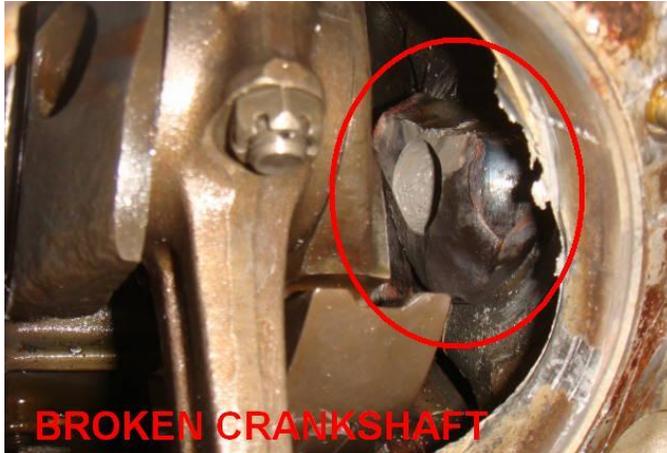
rupture of the crankshaft as seen after removal of one cylinder
